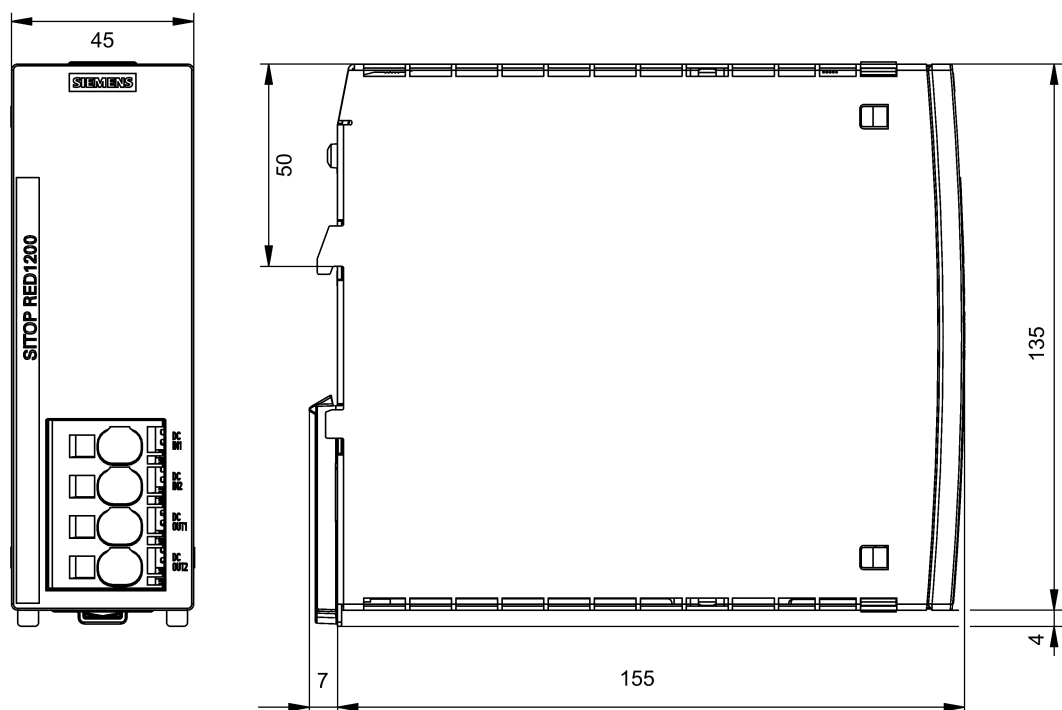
Dimension drawing 6EP4348-7RB00-0AX0
